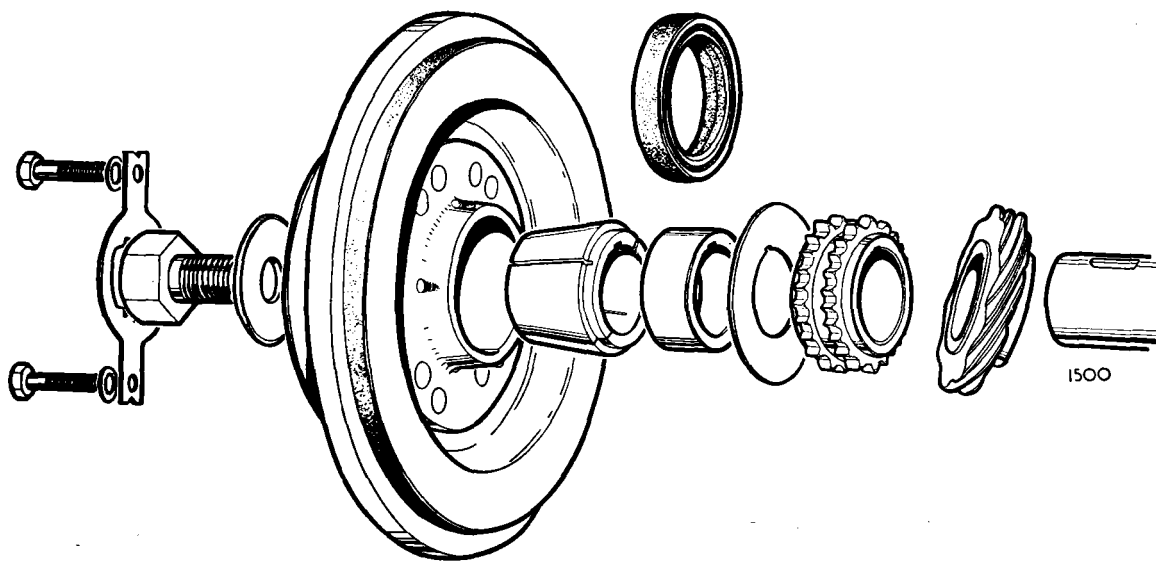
The crankshaft damper (3.4/3.8 litre illustrated).
